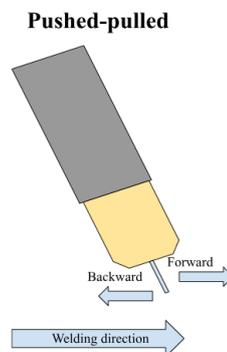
Pushed-pulled mode in switchback welding.
